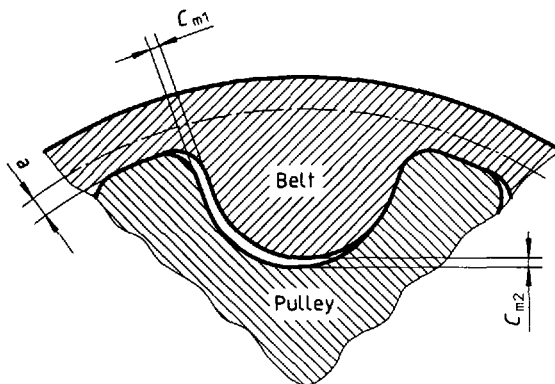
Clearance between measuring pulley and belt types ZH and YH (see table 9)
